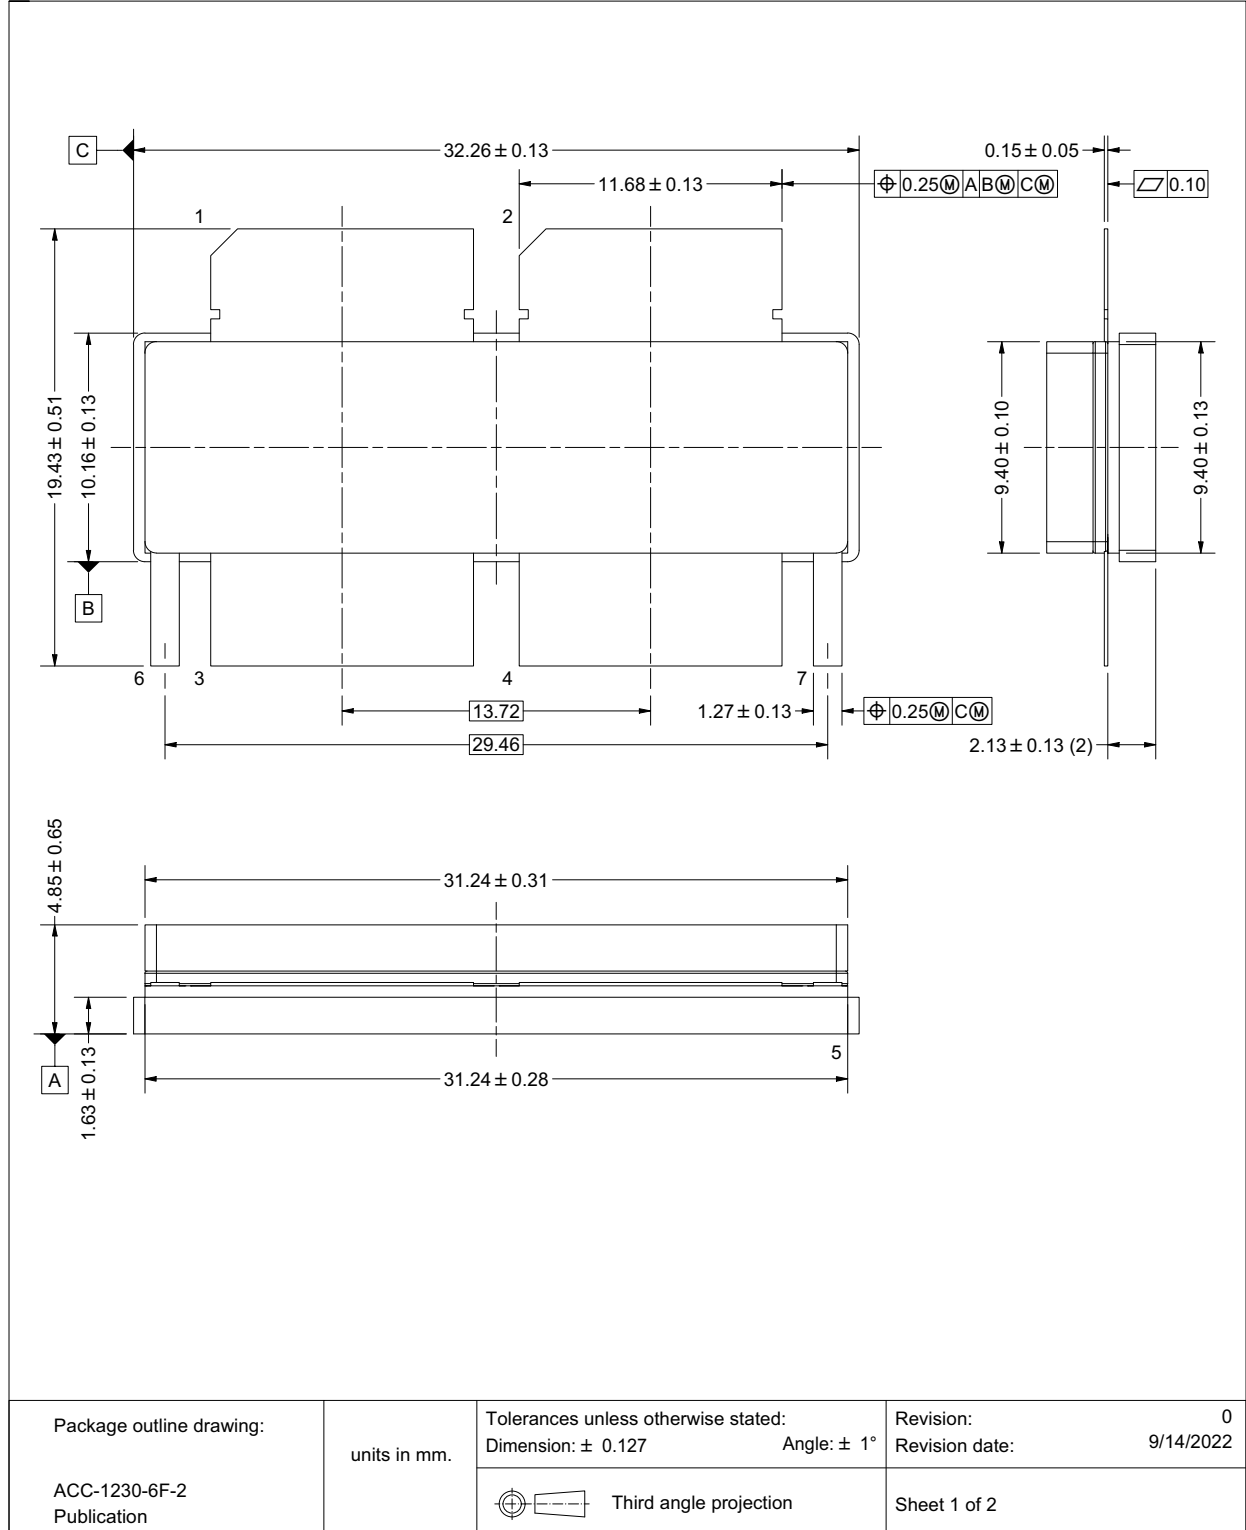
Package outline ACC-1230-6F-2 (sheet 1 of 2)
